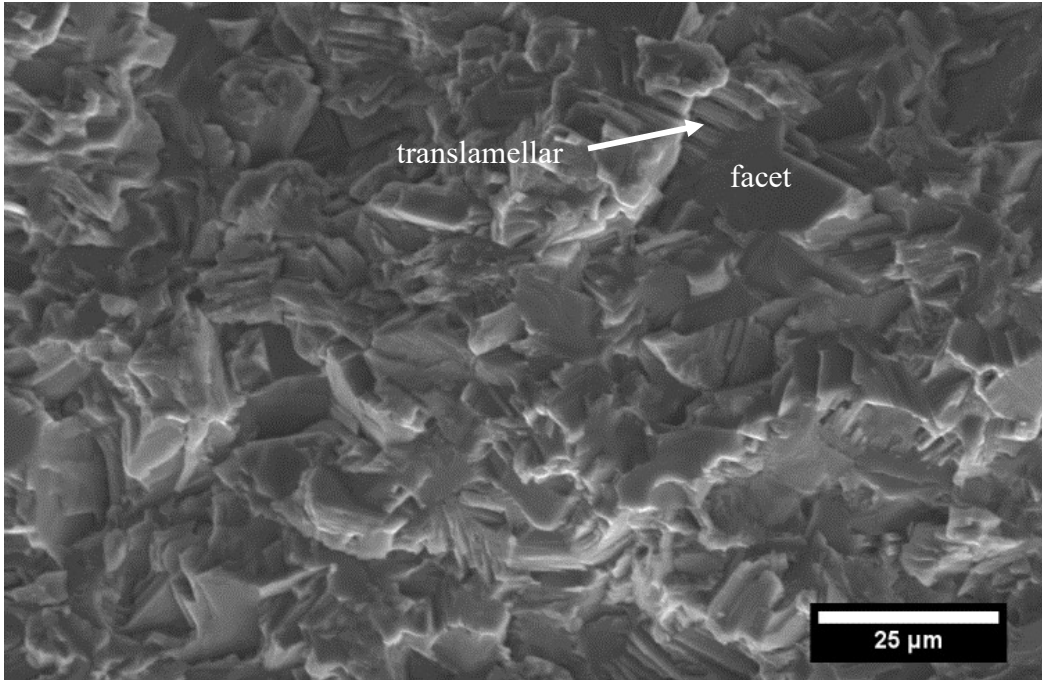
Representative fatigue crack SEM-SE fractography of upset-forged fatigue fracture features in the high  $\Delta K$  regime at  $R = 0.1$ . Crack direction is from top to bottom.
